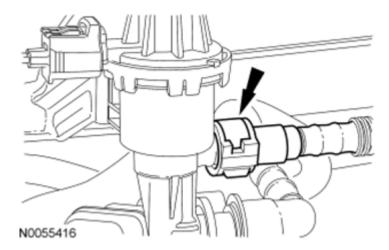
Locating Upper Evaporative Emission Tube Courtesy of FORD MOTOR CO.
